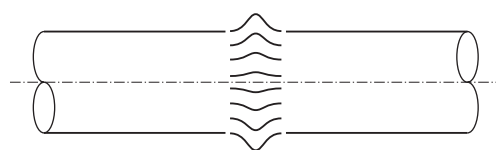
Upset welding of a cylindrical bar
